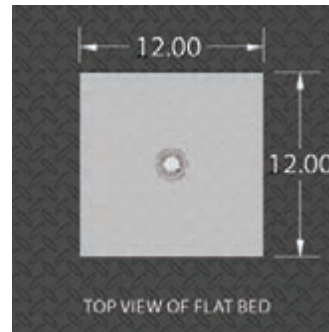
Top view: Recommended that the Shift Lock coupler have a minimum clearance of 12" x 12".
